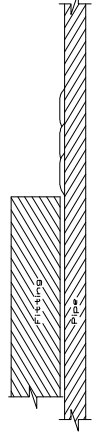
Encirclement Split Tee fitting Welding sequence
